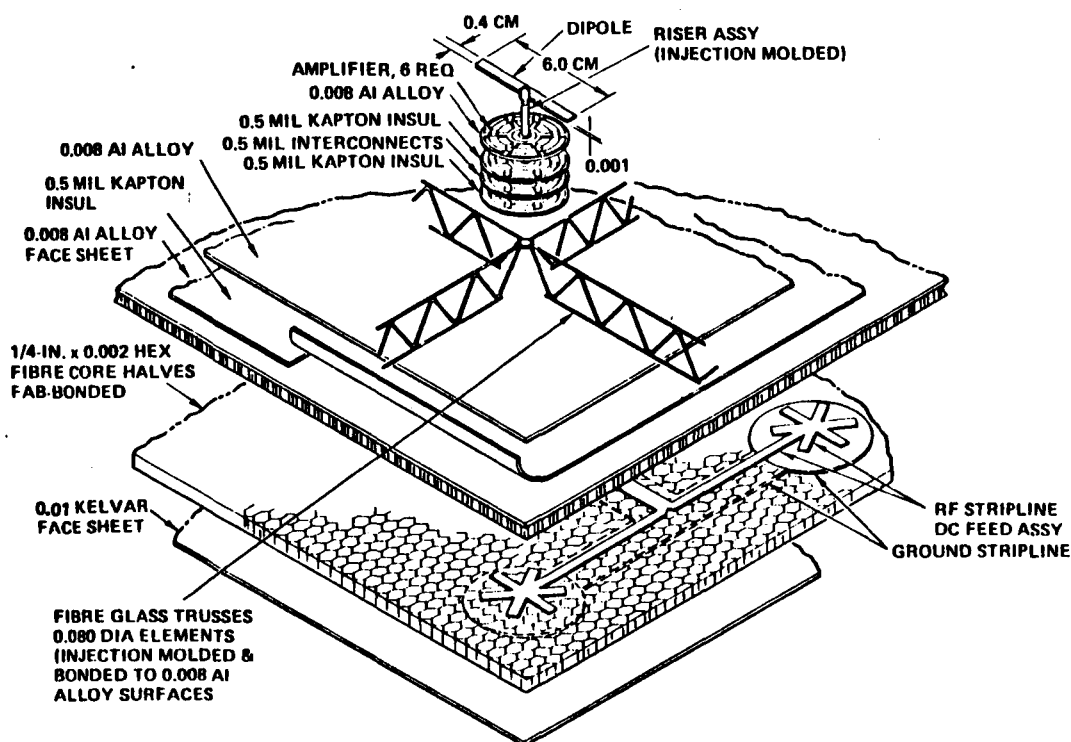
Dipole Amplifier Assembly—Exploded View,
